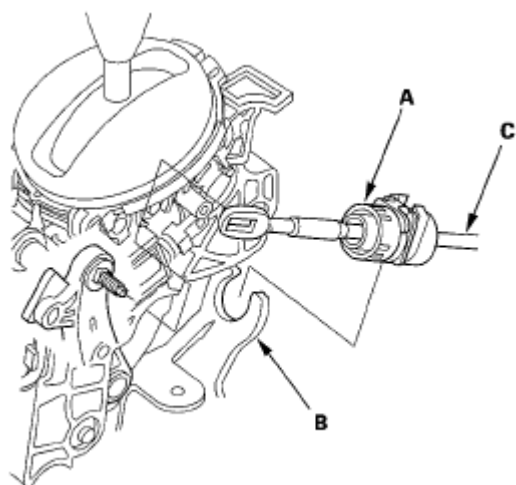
Identifying Socket Holder Retainer, Socket Holder Bracket And Shift Cable
